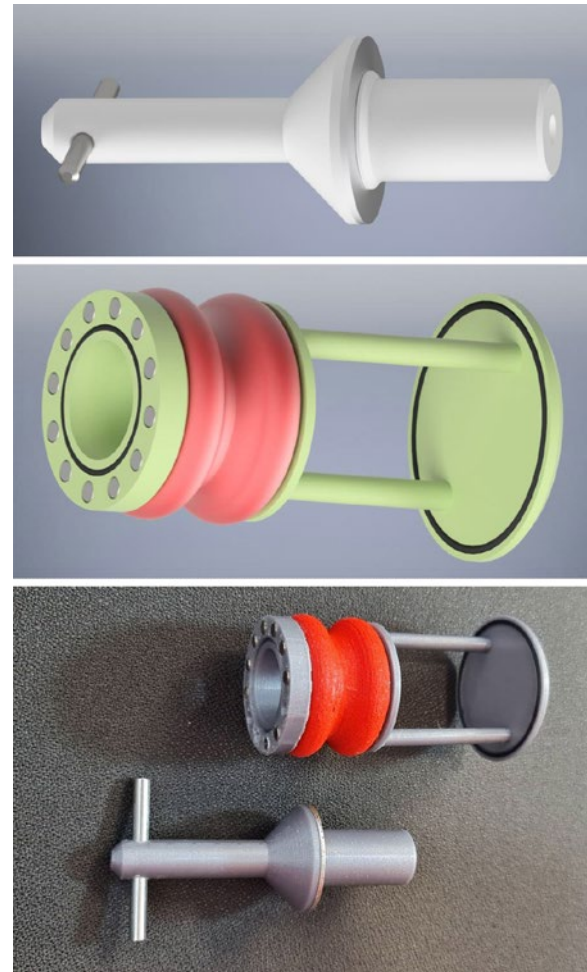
Three-part airlock for sampling (above: Handpiece/swab holder; middle: piston insert with sealing ring; bottom: printed components)
